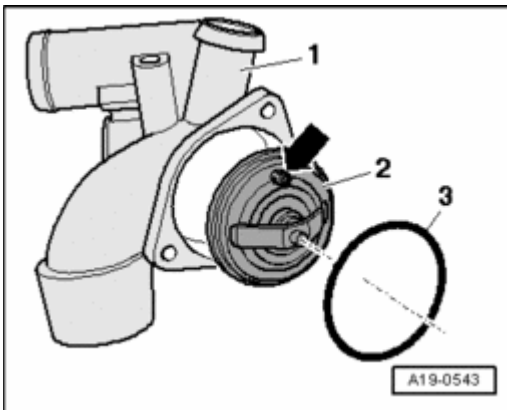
Removing O-Ring With Thermostat From Thermostat Housing
